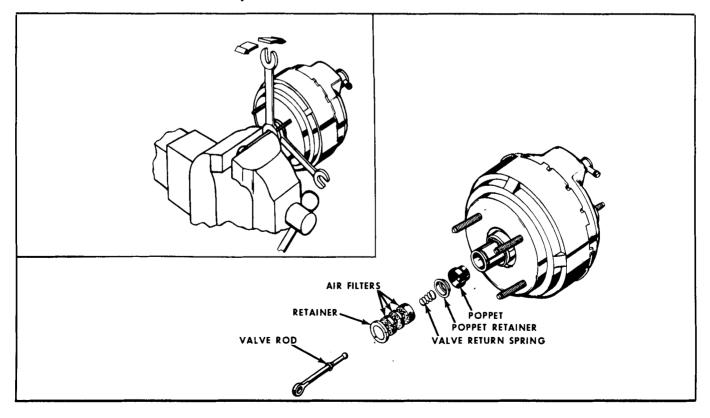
C-6 Valve Rod Retainers, Filters and Poppet
